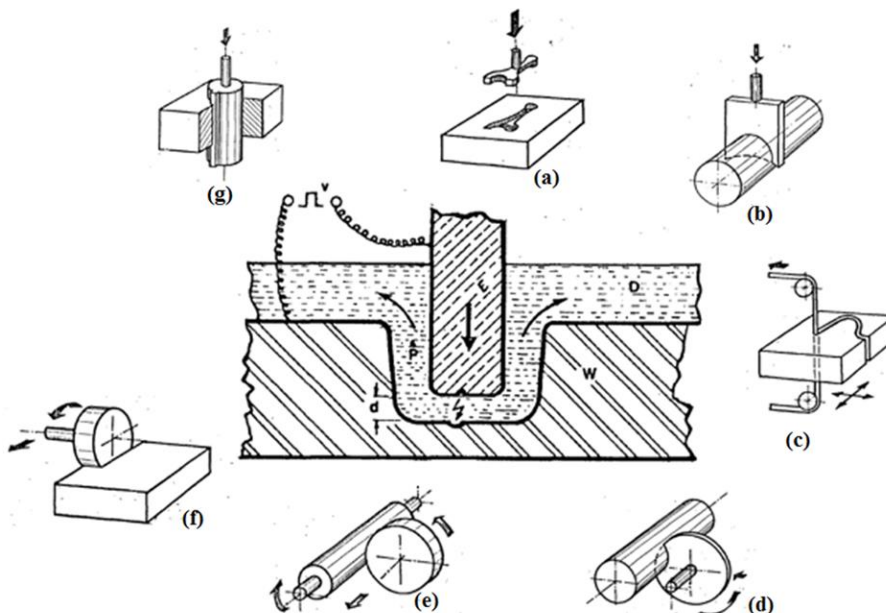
Electrical discharge machining by (a) diving, (b) blade, (c) wire, (d) disk, (e) planetary grinding, (f) plane grinding and (g) drilling [10].
